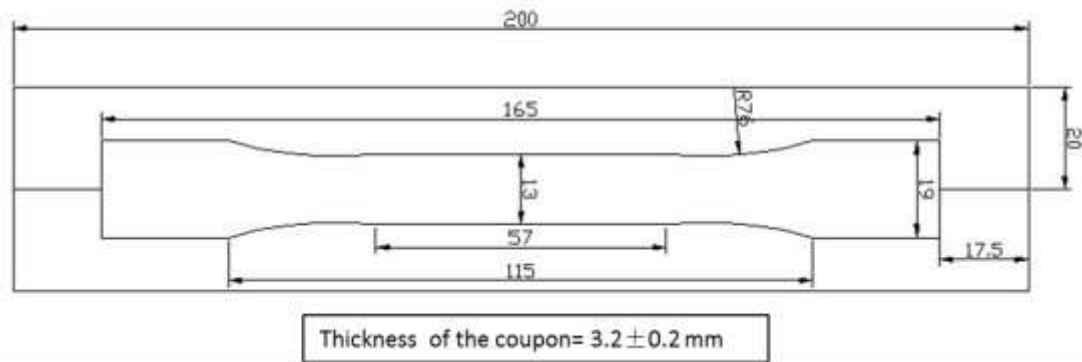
Dimension of adhesive coupons and molds (ASTM 638-10, thickness: 3.2mm)
